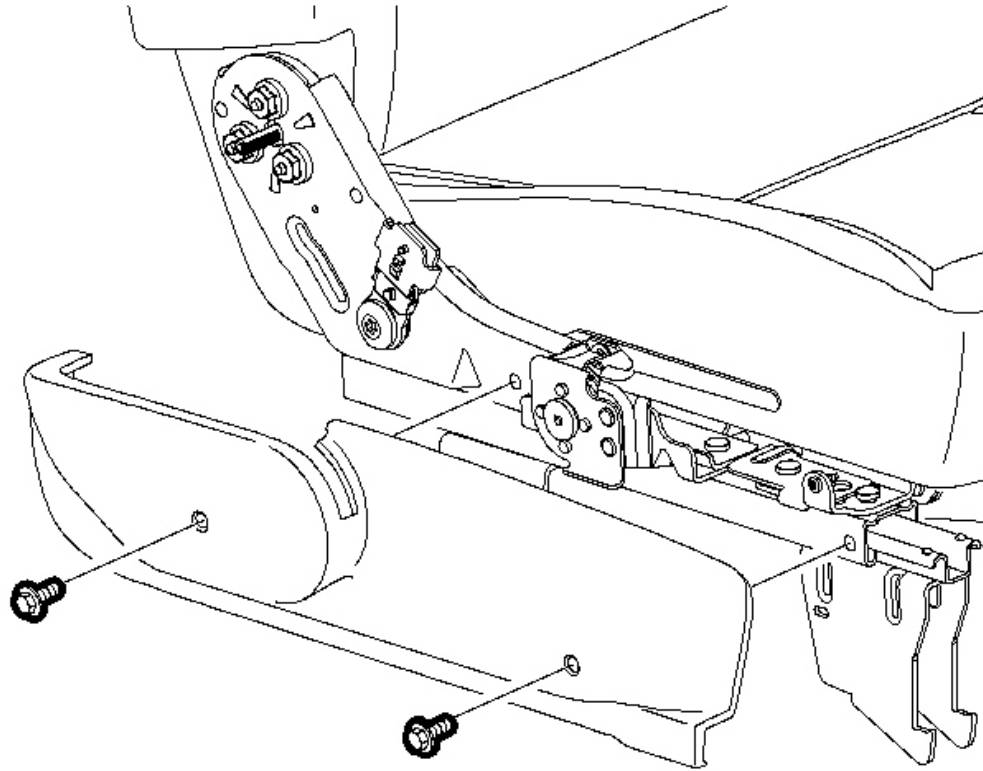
Removing/Installing Outer Trim Panel & Secure With Trim Panel Screws
